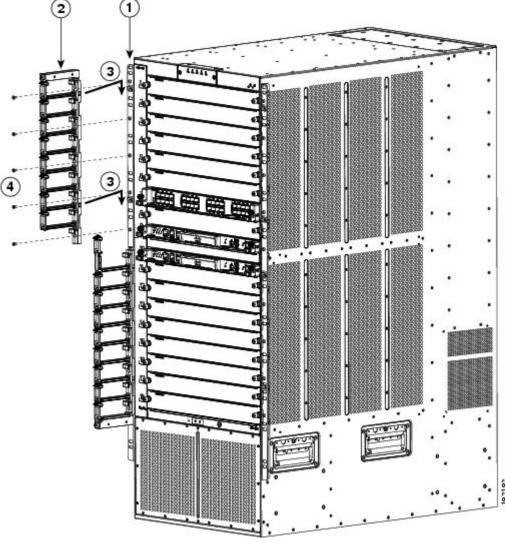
Attaching a Left Cable Management Assembly to a Rack-Mount Bracket
